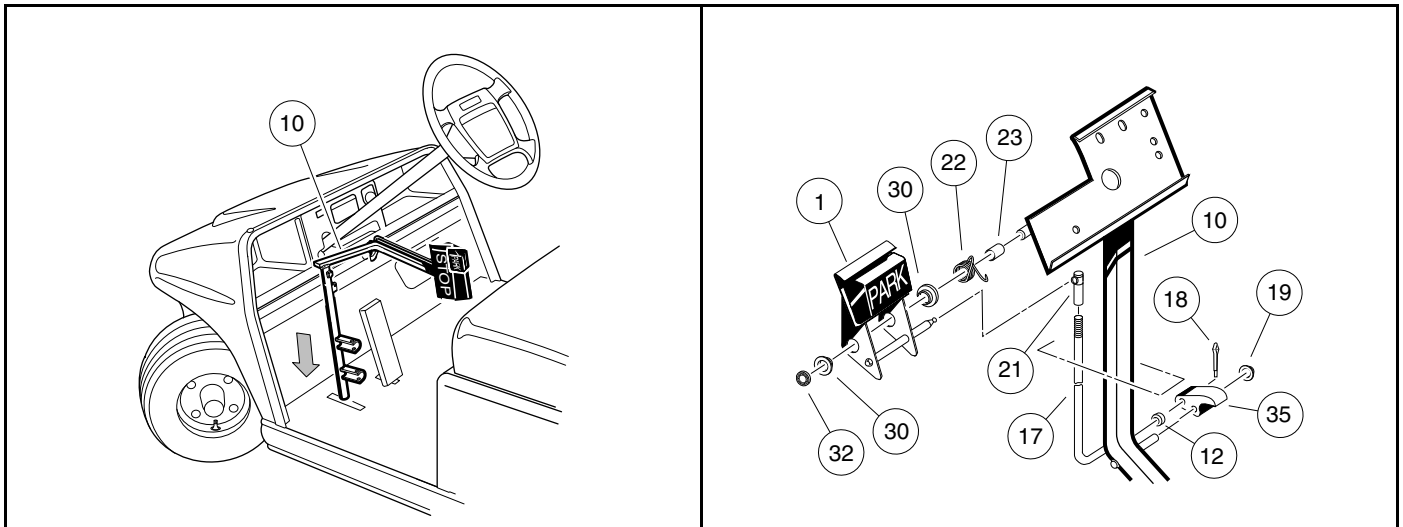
Brake Pedal Weldment Through Floor
